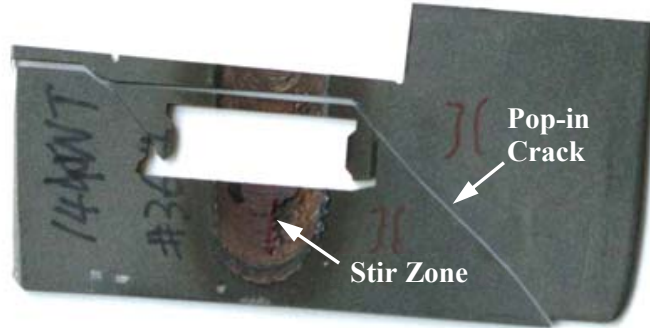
The 1 mm thick 14YWT plate following the abrupt pop-in crack that occurred during fabrication of the SS-1 tensile specimen by wire EDM.
